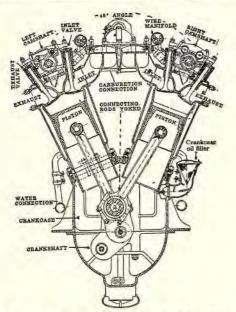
A twelve-cylinder, or "twin-six" engine with valves-in-the-head operated by overhead cam shafts. This is the Liberty Airplane engine. The cam shaft is driven in a manner similar to that shown in Fig. 95.
